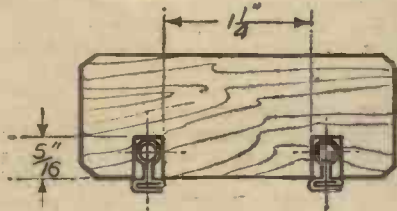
Wooden gauge for correctly assembling the rails on the sleepers.
